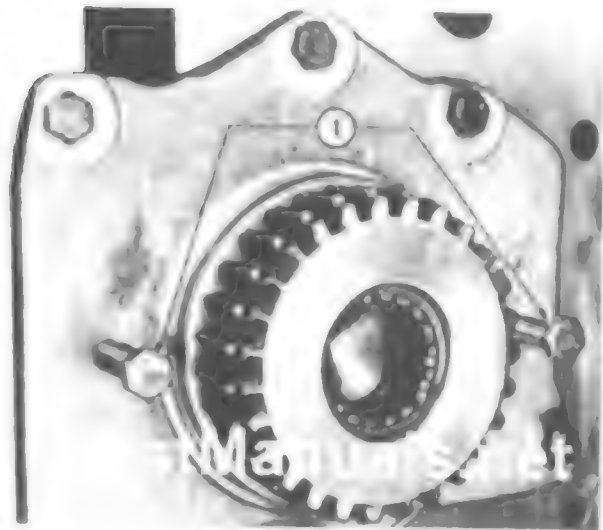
Remove cap screws (2) which attach the charge pump pressure manifold (front) and suction pipe (rear) to the pump. Use jack screws (1) to force pump forward for removal.
